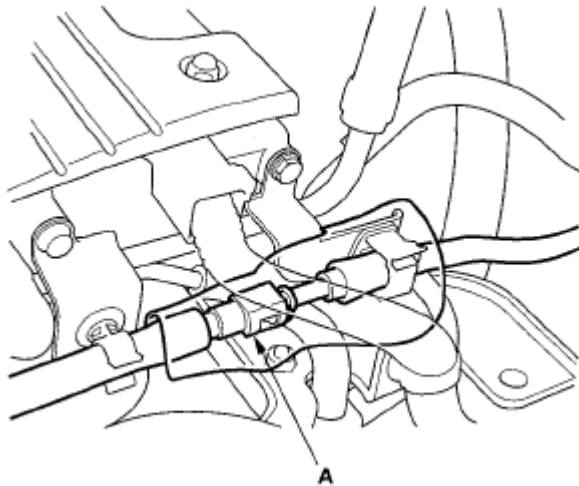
Identifying Fuel Quick-Connect Fitting For Dirt And Clean
